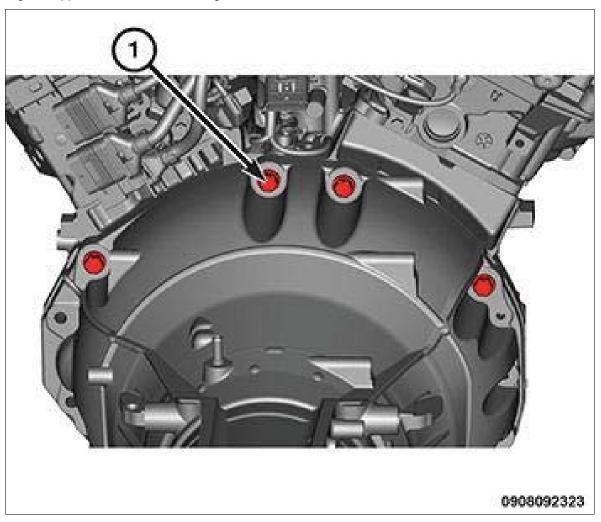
Rubber Plugs Covering Rear Oil Seal Retainer Flange Bolts
